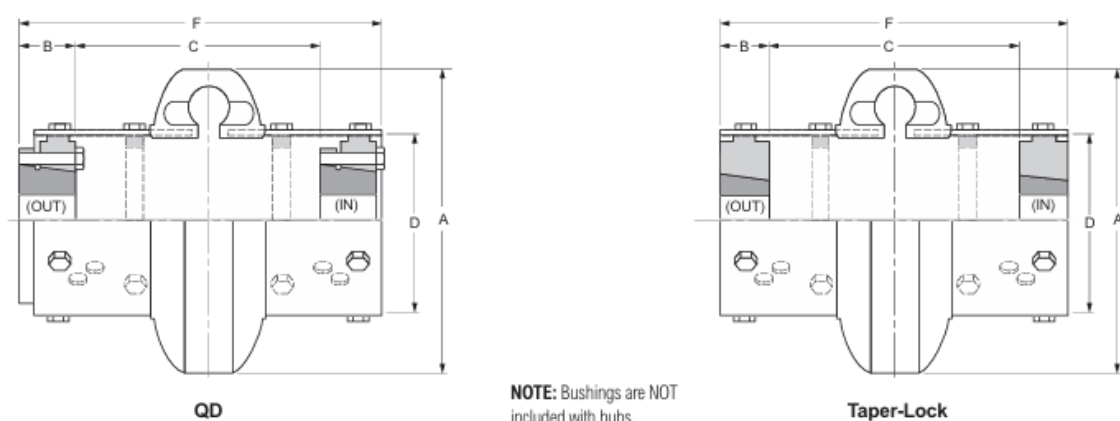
Cross-sectional engineering schematic of the OMEGA™ spacer layout coupled via compression taper bushed hubs.
